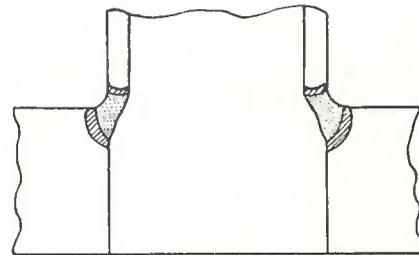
Joint configuration of heat exchanger tube/tubesheet weld for a sodium cooled fast reactor (Ref. 23)
